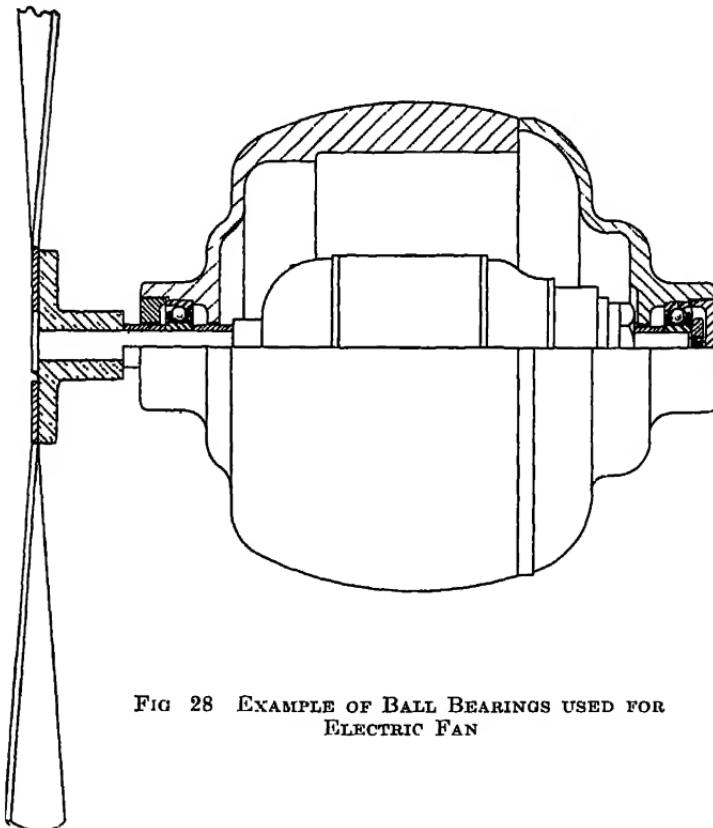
EXAMPLE OF BALL BEARINGS USED FOR ELECTRIC FAN
